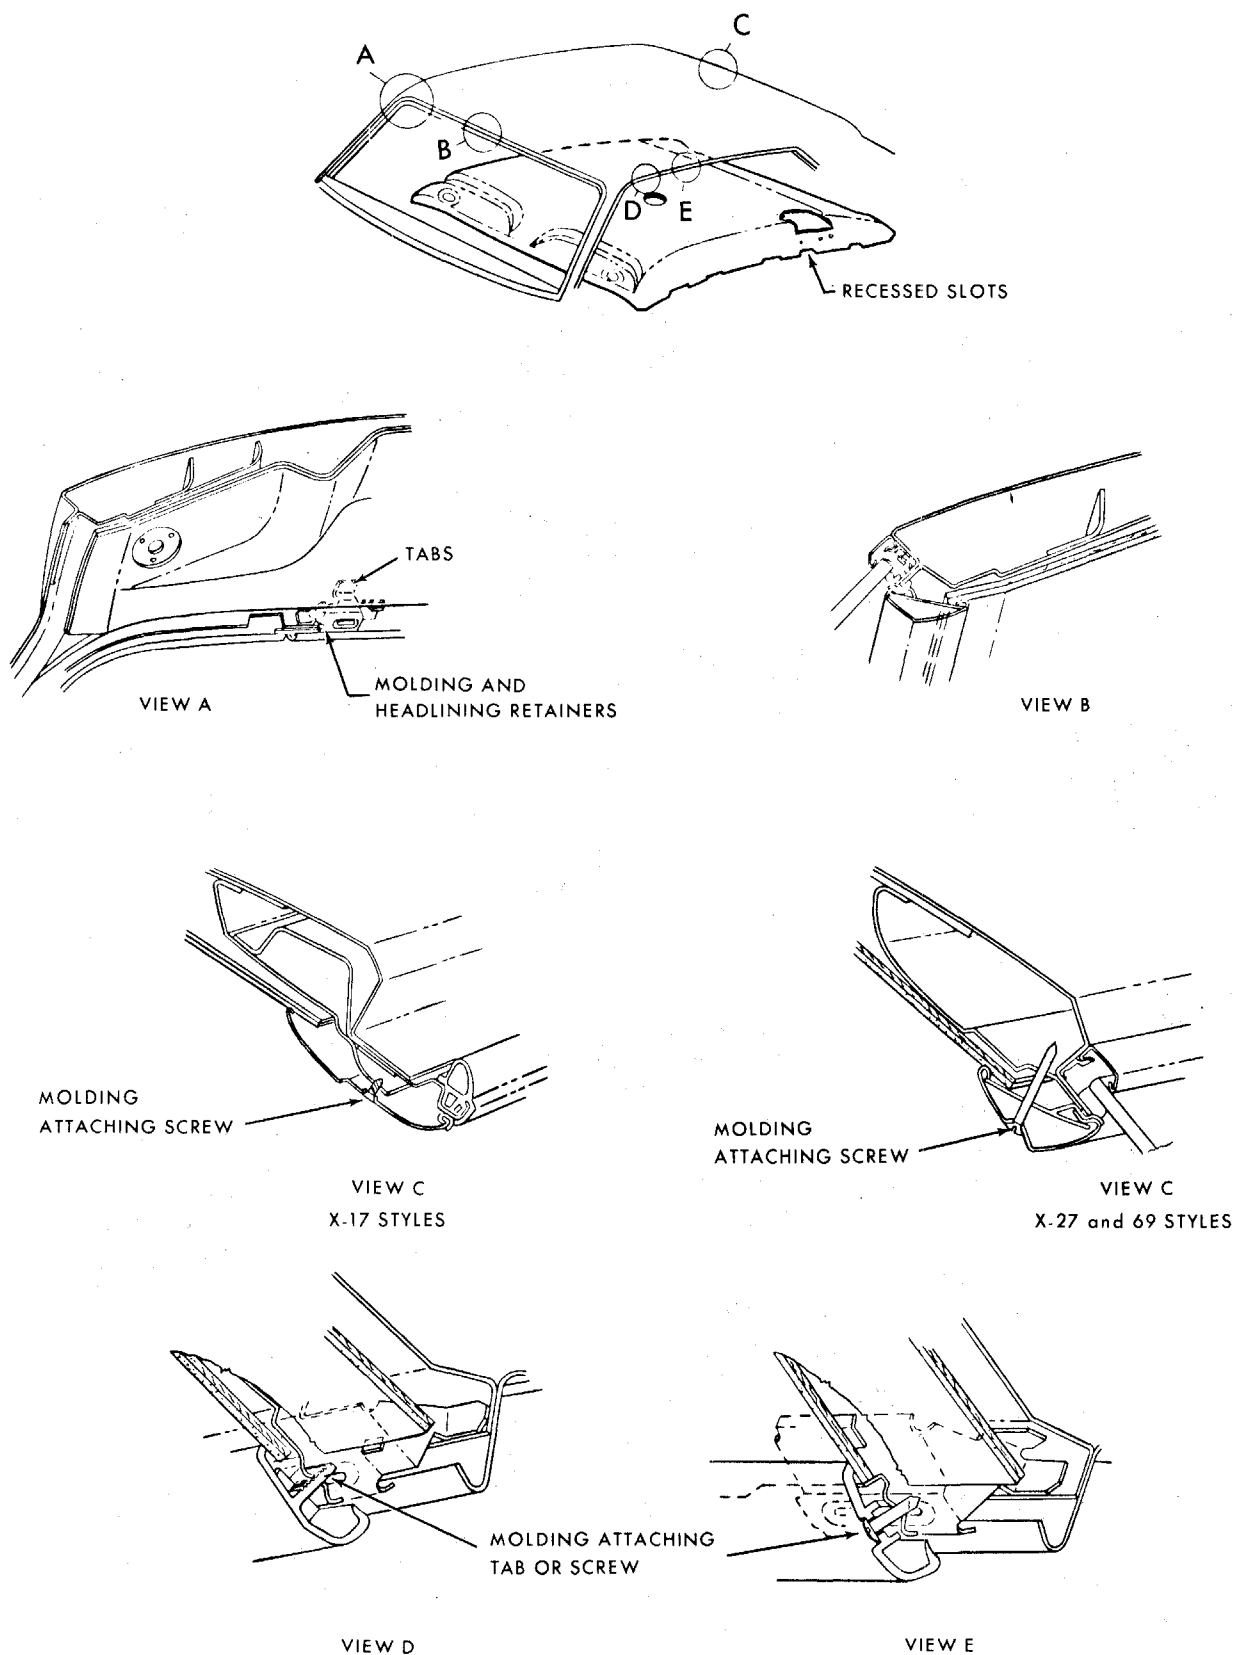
Headlining (Roof Interior Finishing Panel) Assembly - "11 and 15" Styles
